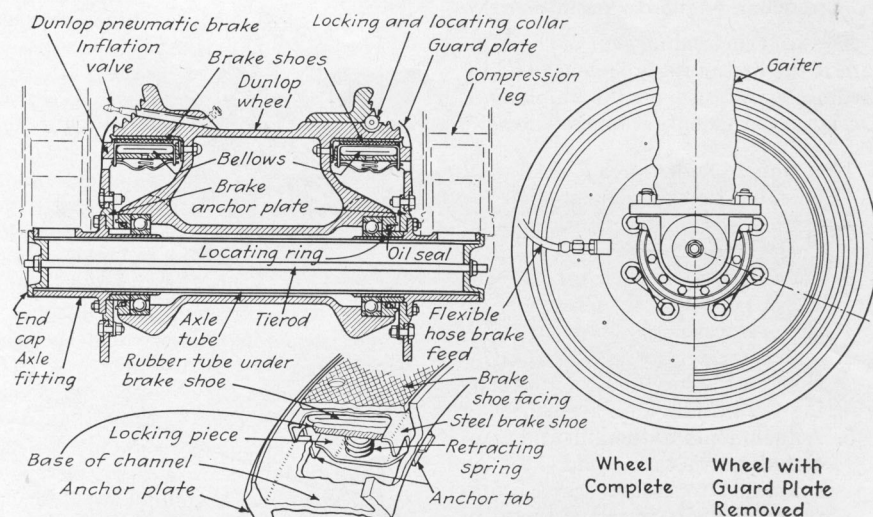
A section through the landing wheel showing the arrangement of the twin pneumatic brakes mounted on a hollow axle. Brake anchor plates on each side of the wheel enclose the braking surfaces and transmit brake torque to the axle and struts. The detail shows the method of holding the brakes in position.
